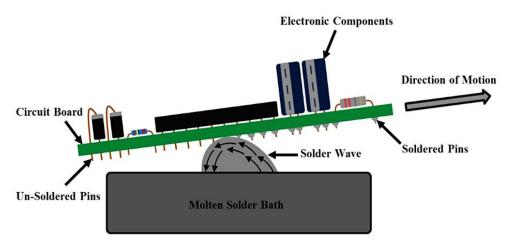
Wave soldering of a PCB (Anil, 2012).
